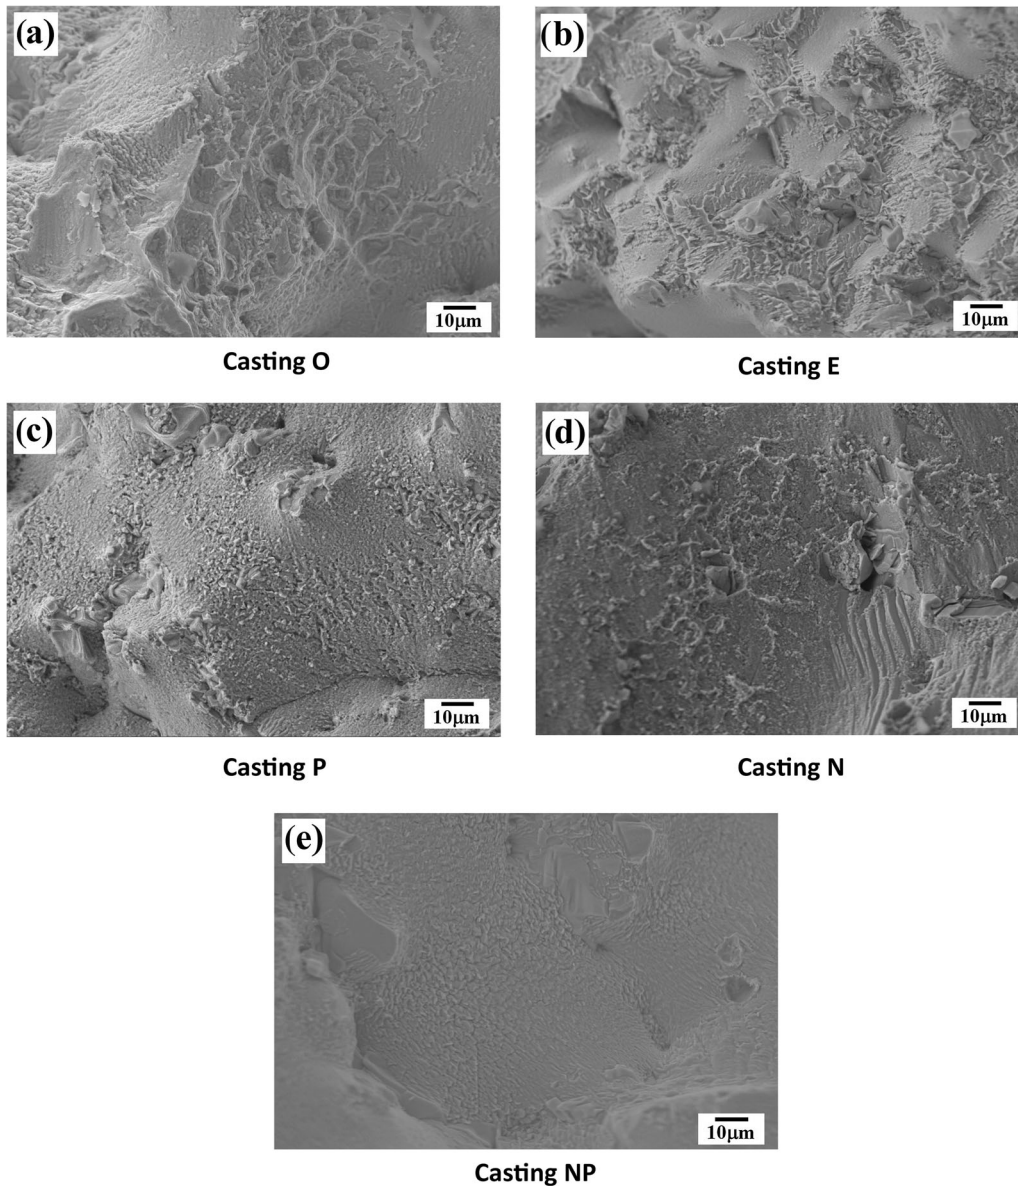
Fracture surfaces of on-heating samples pulled at 1100 °C: (a) casting O, (b) casting E, (c) casting P, (d) casting N, and (e) casting NP.
